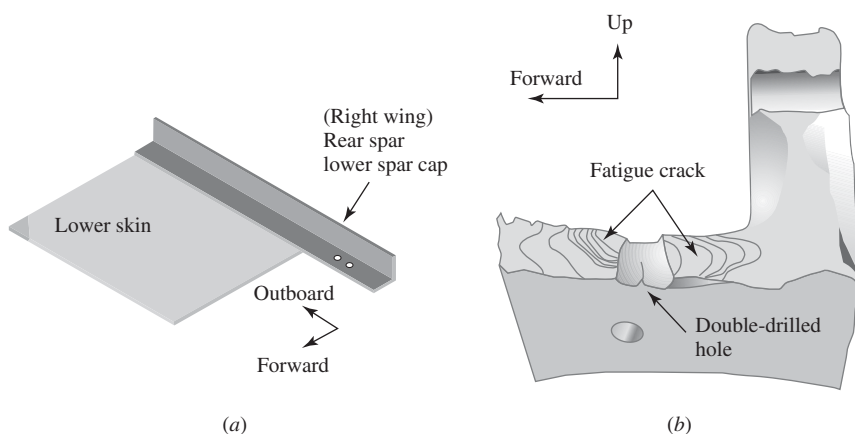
(a) Rear spar cap and lower skin assembly. (b) Right wing rear spar lower spar cap fracture. Fatigue crack initiated from a double-drilled hole created during maintenance.
